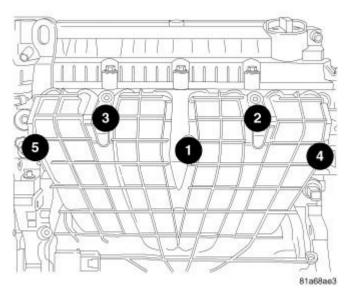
Intake Manifold Bolt Removal & Tightening Sequence Courtesy of CHRYSLER GROUP, LLC
